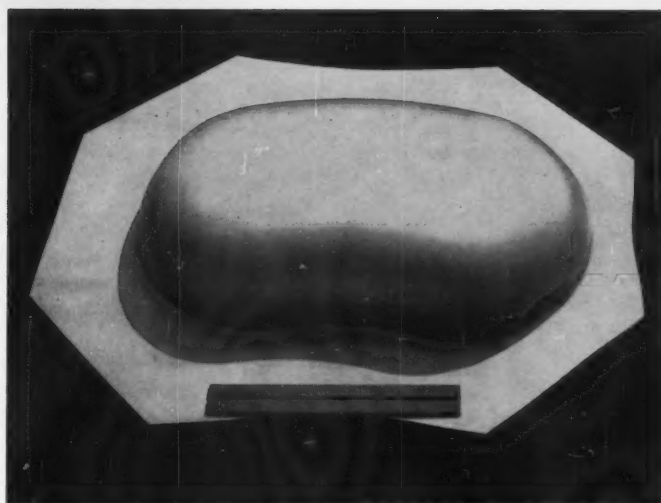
(Left) Typical part drawn from sheet aluminum in a Verson-Wheelon press, the cavity produced measuring 7 by 12 inches and having a depth of 1 7/8 inches
